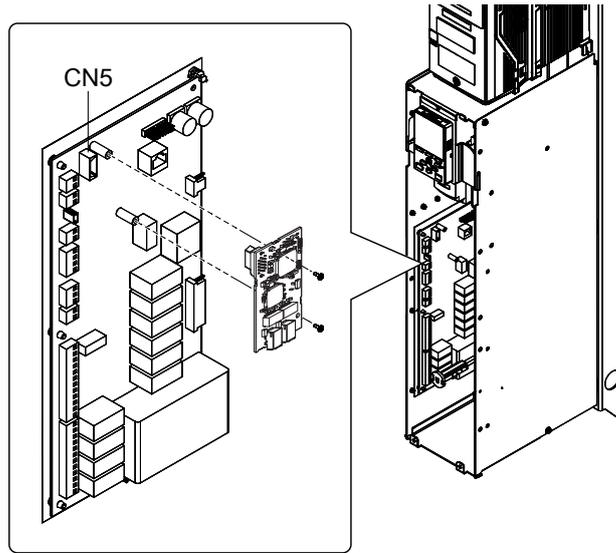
Insert Option into Bypass PCB CN5 Connector Port
